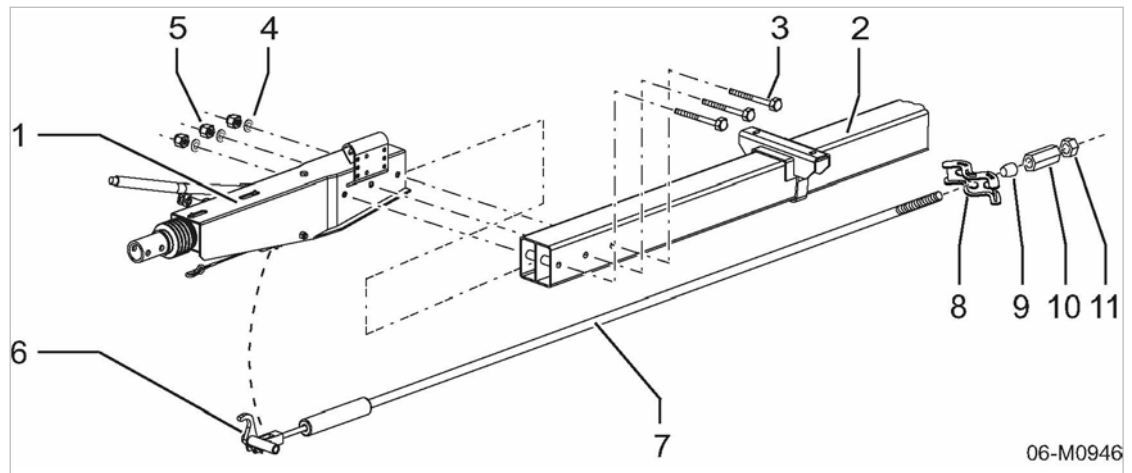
Fitting the overrun braking mechanism of the non-adjustable tow bar
